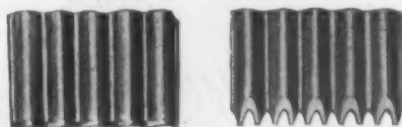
Plain and Saw Tooth Edge Corrugated Fasteners.
